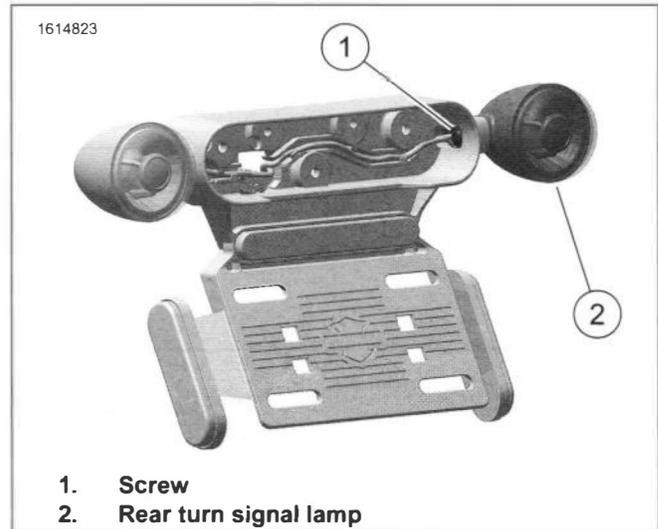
Rear Turn Signal Lamp (right lamp shown) COMPLETE
